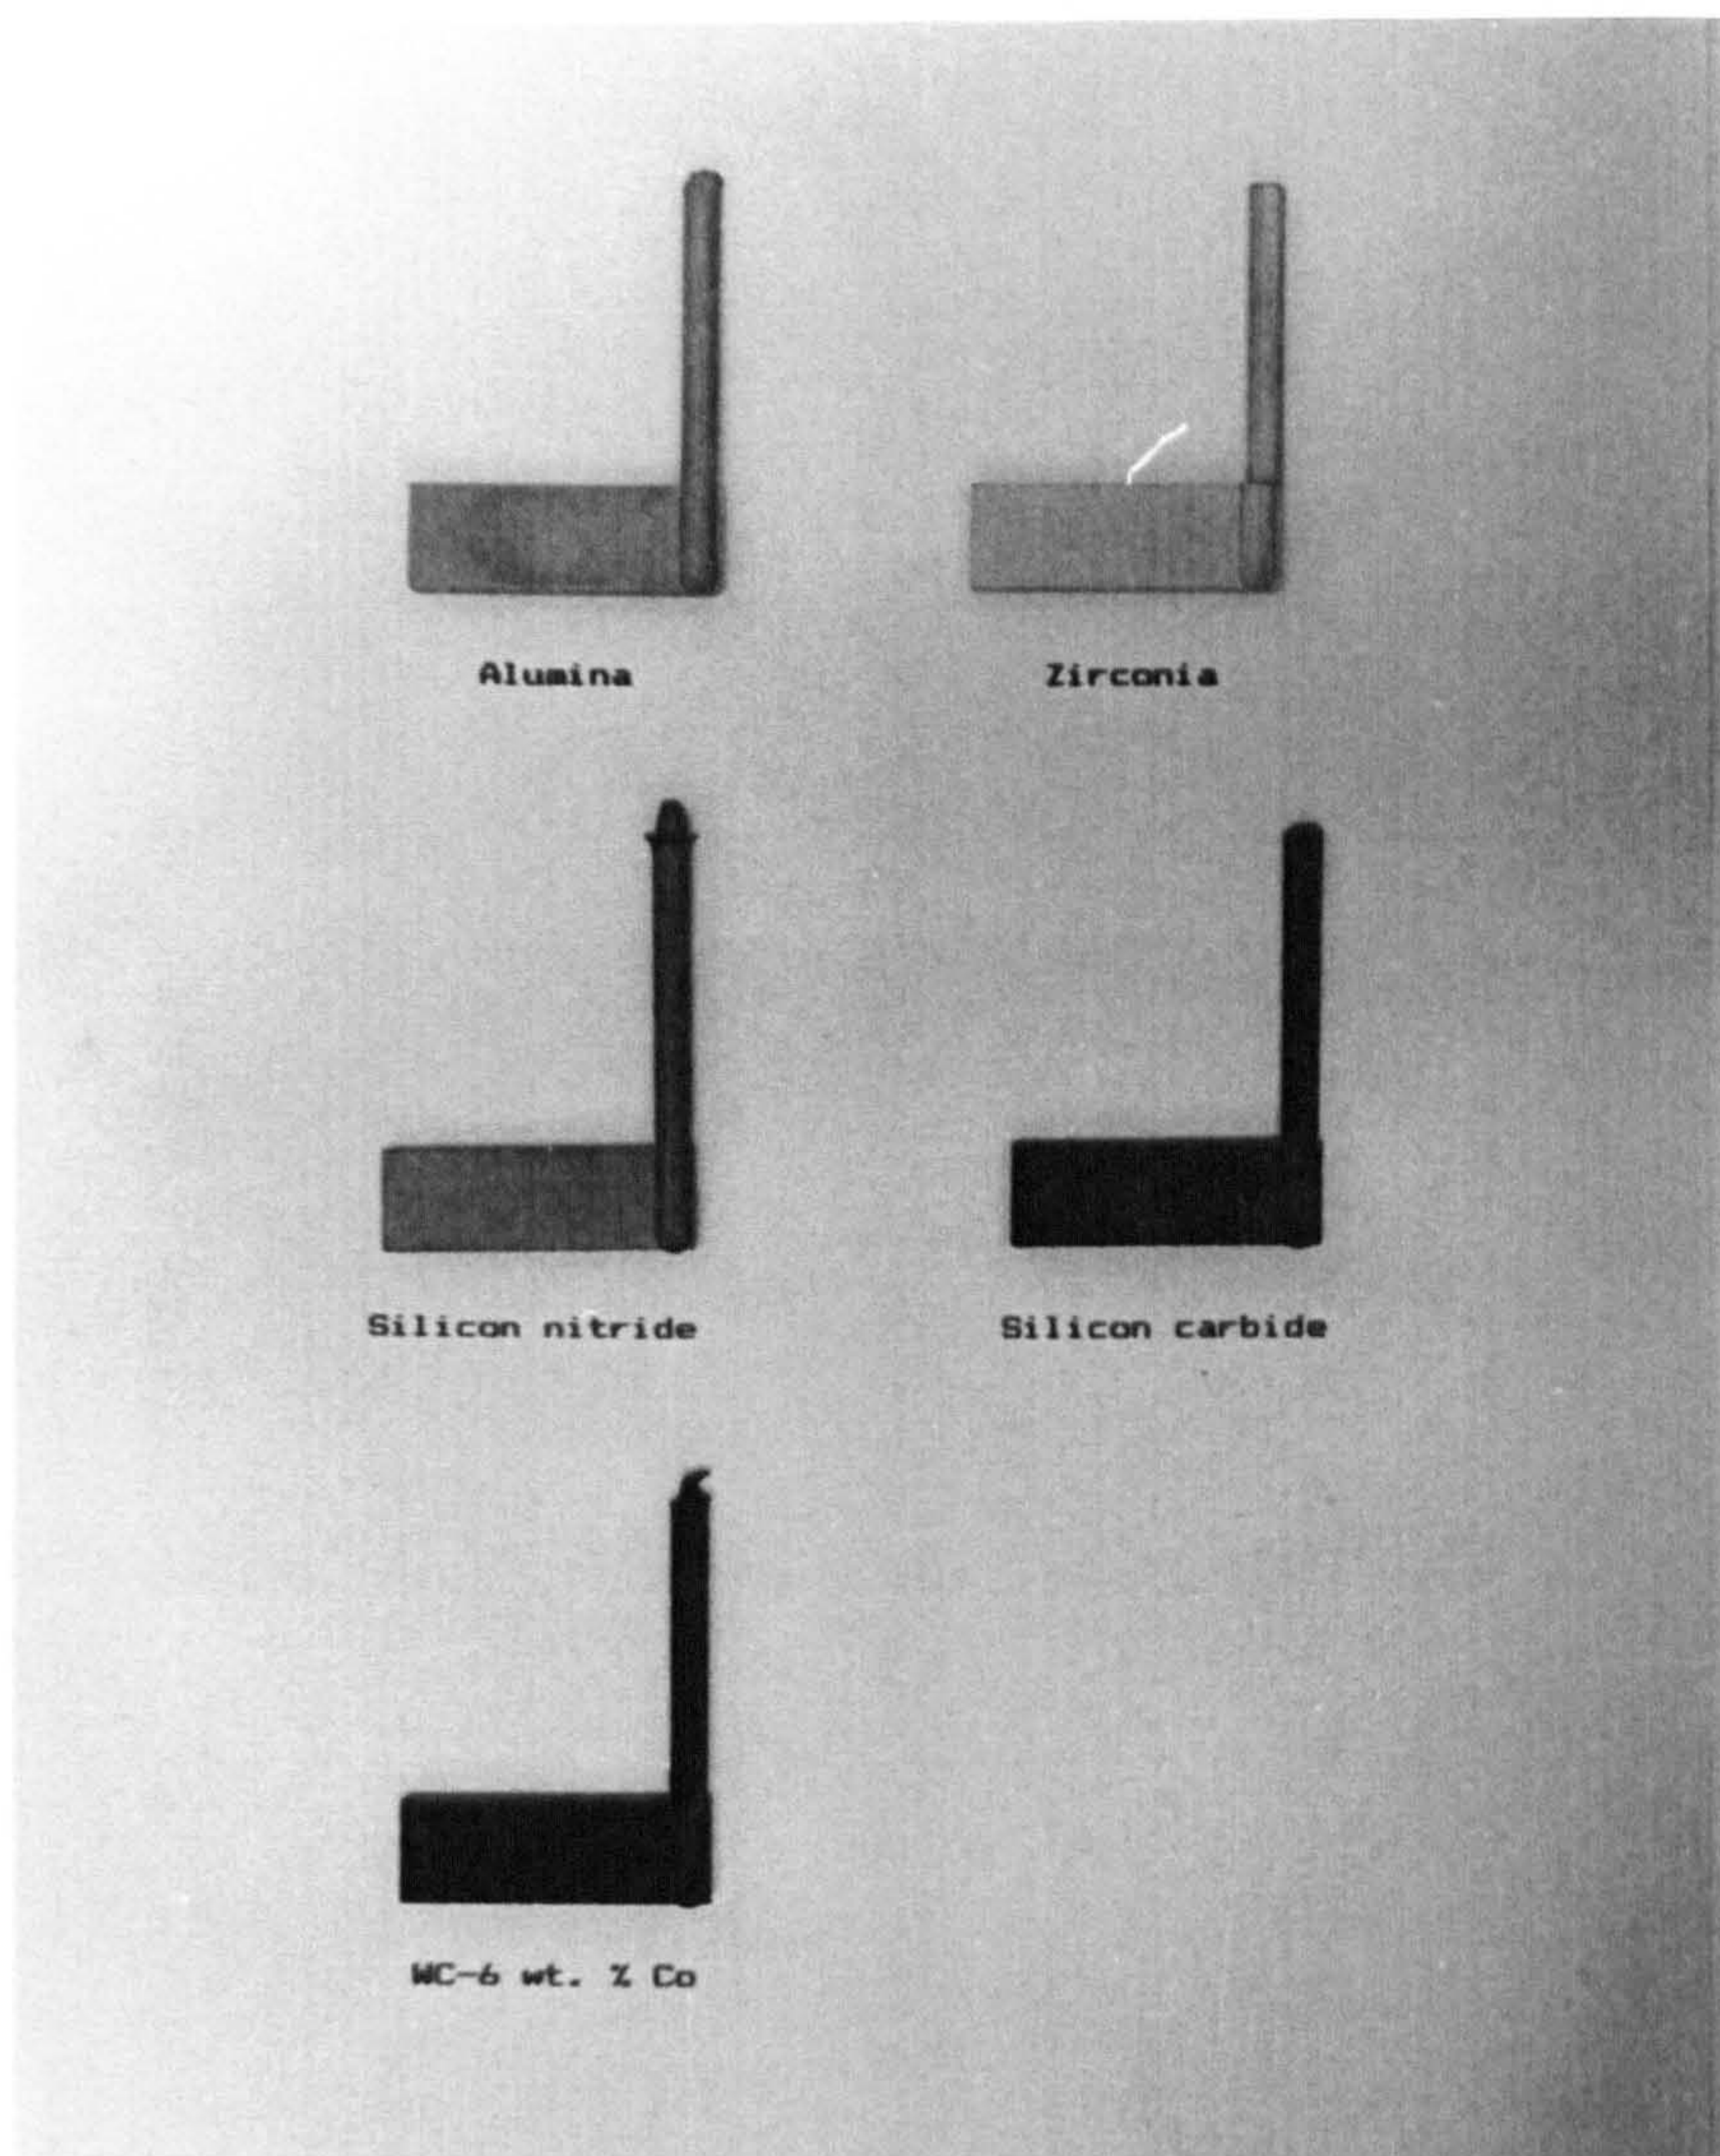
(a) Injection moulded rectangular samples of size 35 mm X 12 mm X 5 mm using the PTCA moulder;
